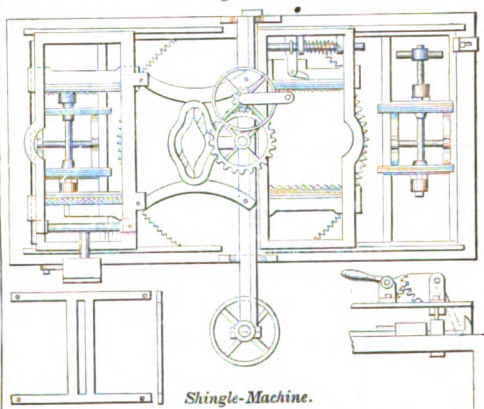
is a top view of a machine of this description. The bolt-carriage is reciprocated by means of a cross-head with a straight slot in which works the wrist-pin of a crank which gives to the carriage an unequal progressive reciprocation; the diamond-shaped slot in connection with the wrist-pin of the crank working therein gives uniform feed to the bolt-carriage. The dogging devices act automatically and operate by weight
